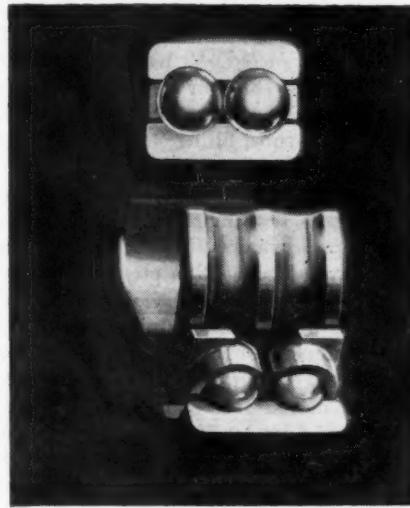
DOUBLE-ROW DEEP-GROOVE BALL BEARING WITH CAST-BRONZE RETAINERS
